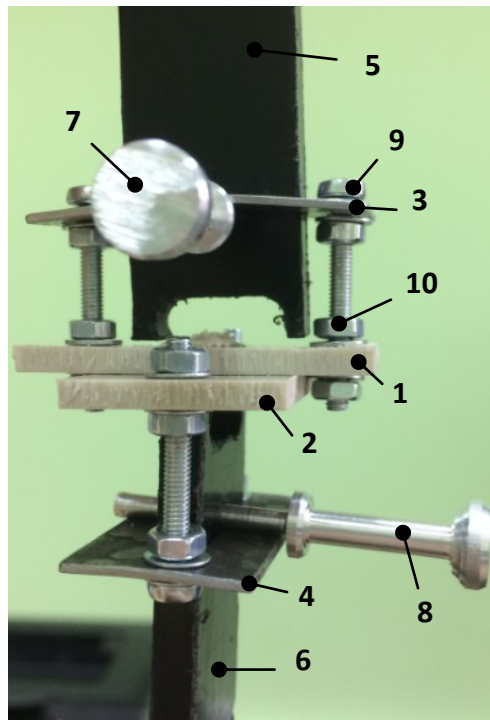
A device for fixing a welded joint sample on a tensile testing machine:
